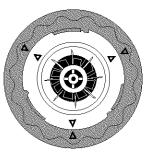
Correct Locking Position of Filter Plate with Motor Assembly
